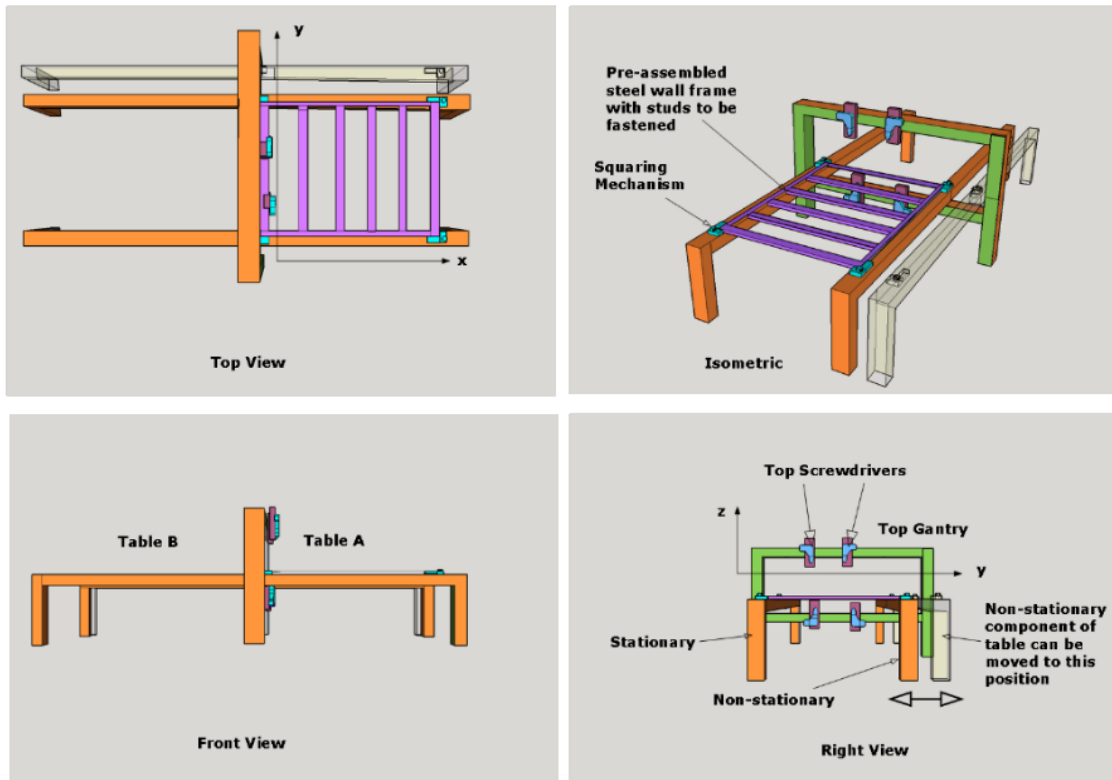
Plan, elevation, and isometric views of steel wall framing assembly
